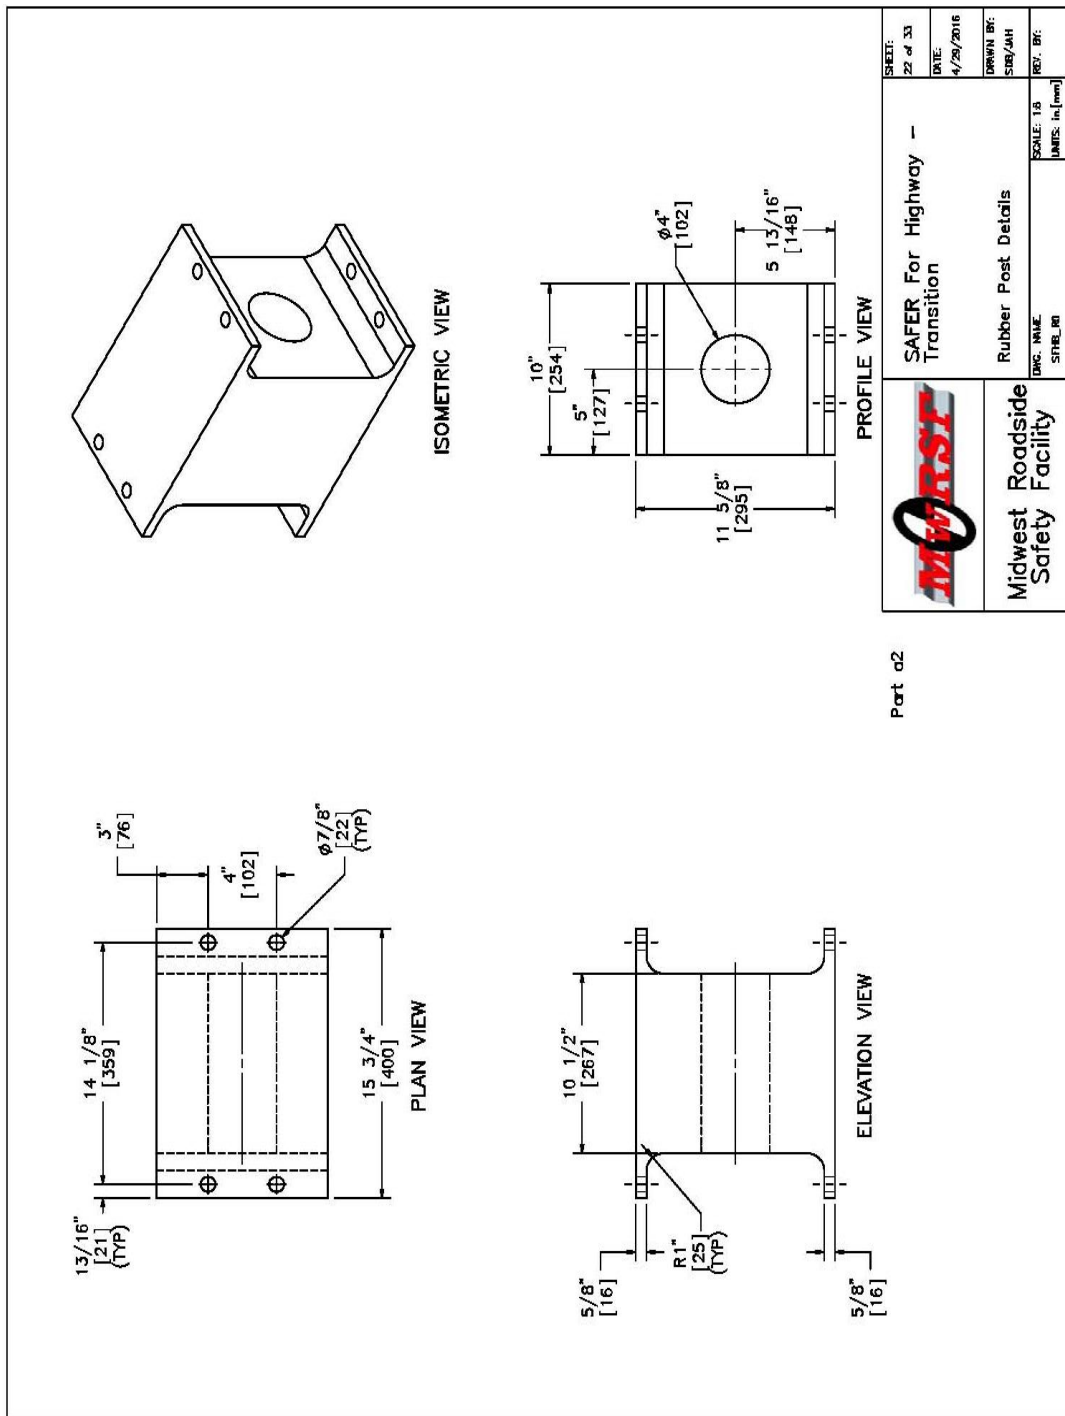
Rubber Post Details, RESTORE Barrier Transition
